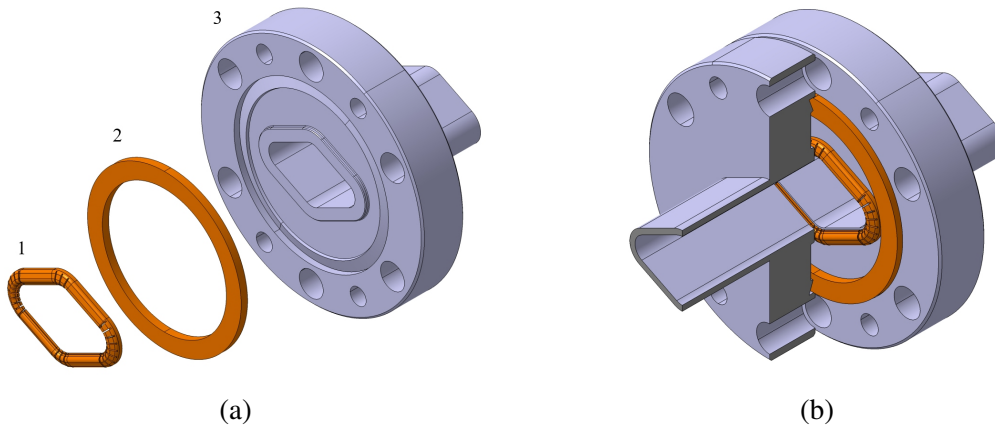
Rhomboidal RF gasket application: (a) the assembly before mounting, the RF contact gasket (1), the CF vacuum gasket (2), the SFL CF40 flange (3) (b) full assembly. (courtesy I. Mrak)
